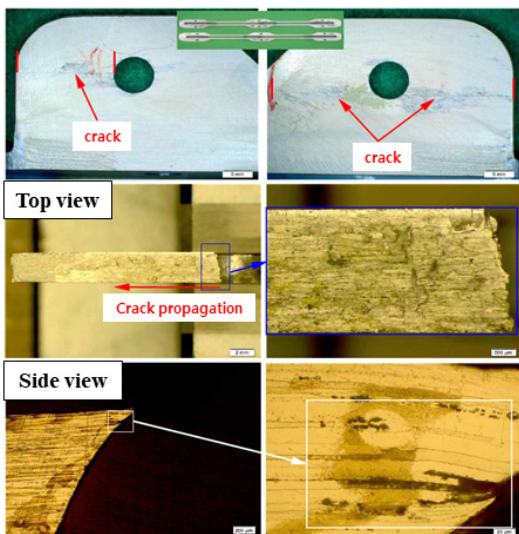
Fracture analysis result of 2nd disassembly inspection
